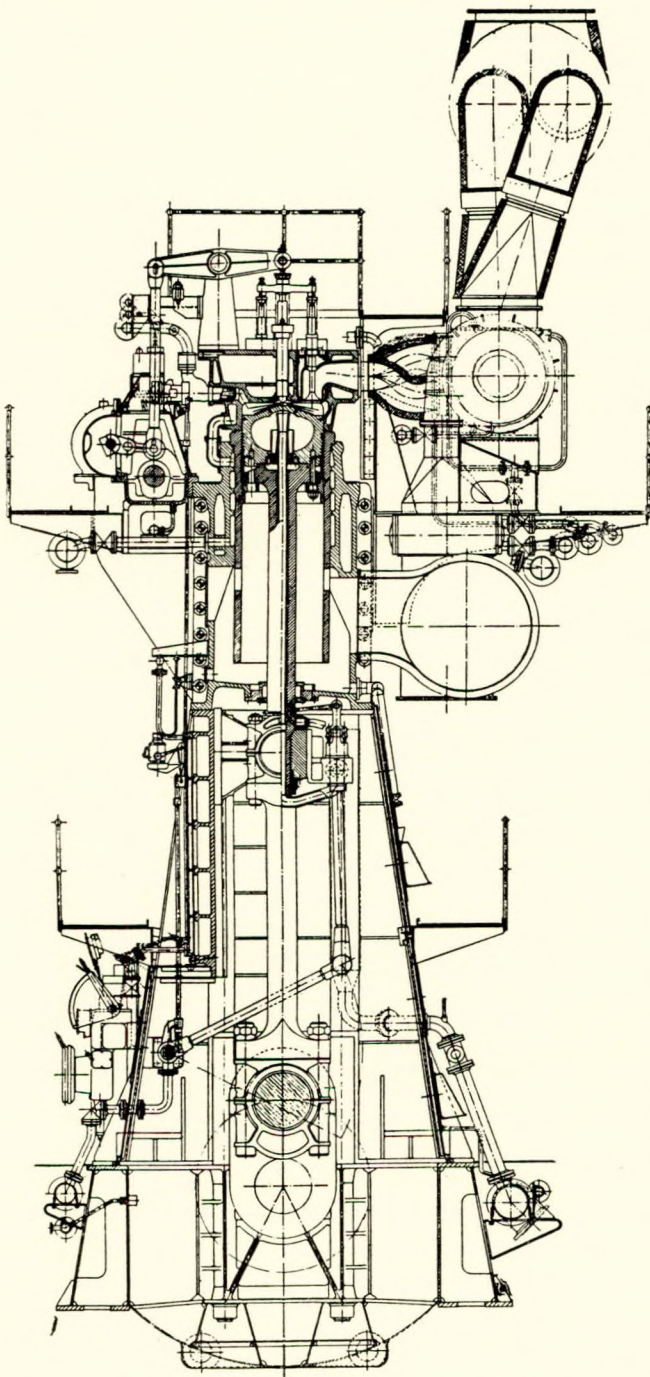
Cross section of engine with uniflow scavenging and turbocharging, type HOTLo 75/160, 750-mm. bore and 1,600-mm. stroke
